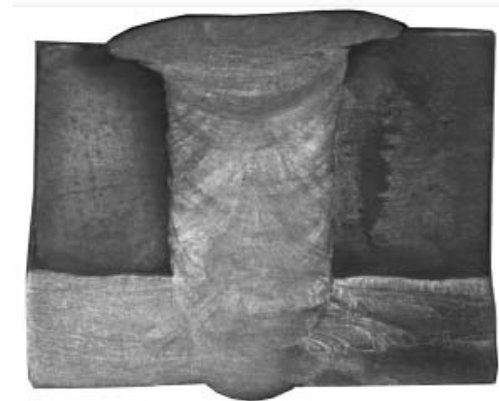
Macrographic section of a narrow groove TIG weld
